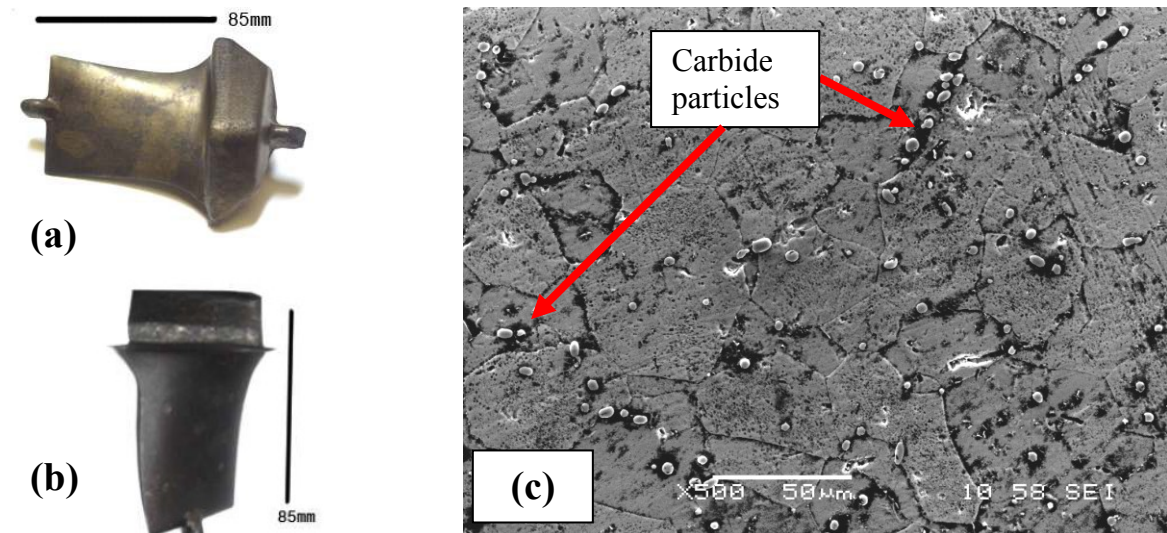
(a) BuRTi blade in the received state, (b) BuRTi blade machined to create section for tests and (c) bulk microstructure
